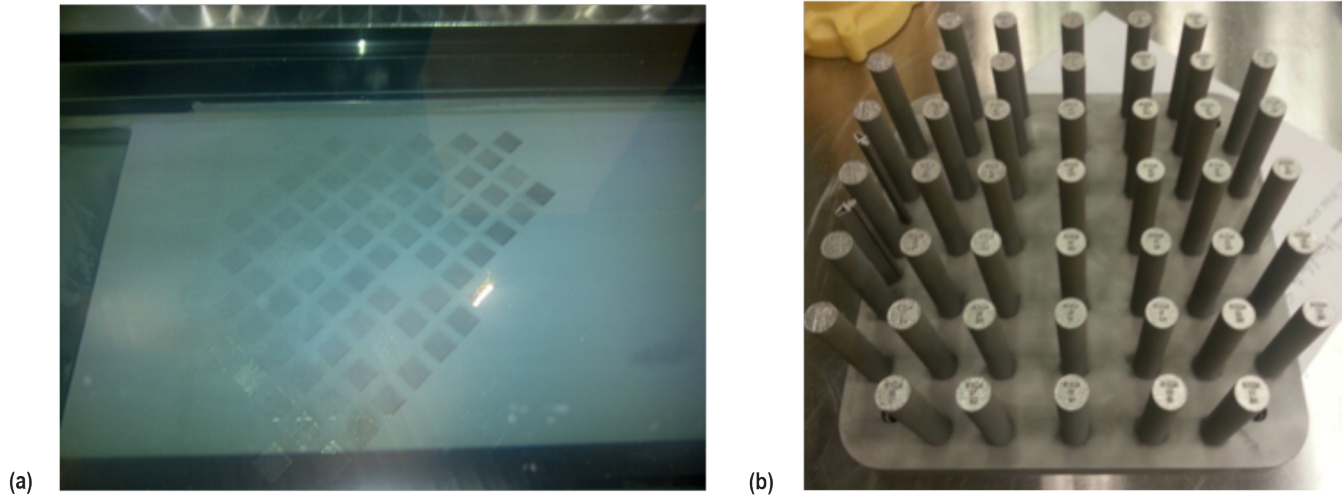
Inconel 625 samples: (a) Samples being built and (b) completed samples ready for testing.
